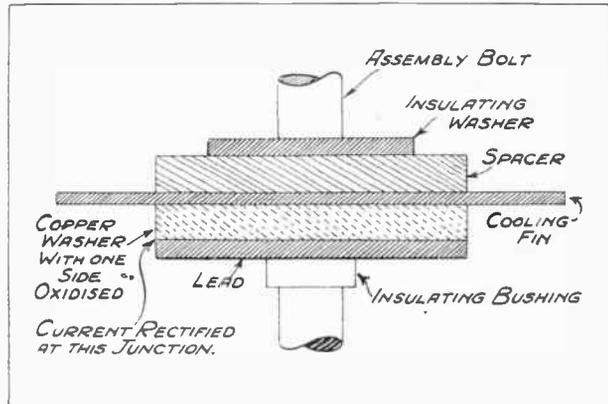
The Westinghouse dry metal rectifier unit is built up in sections in steel bolts such as the one illustrated above.
